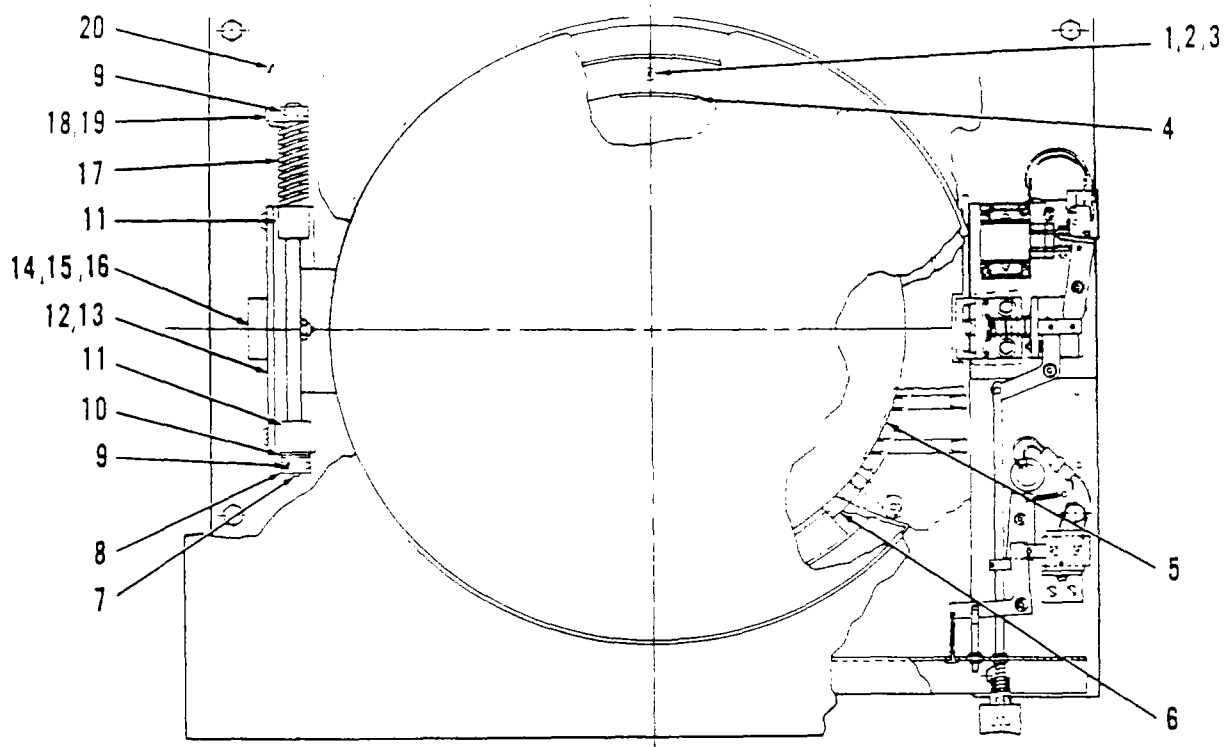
RC-5B PLUS Door Interlock Assembly (Part B)
